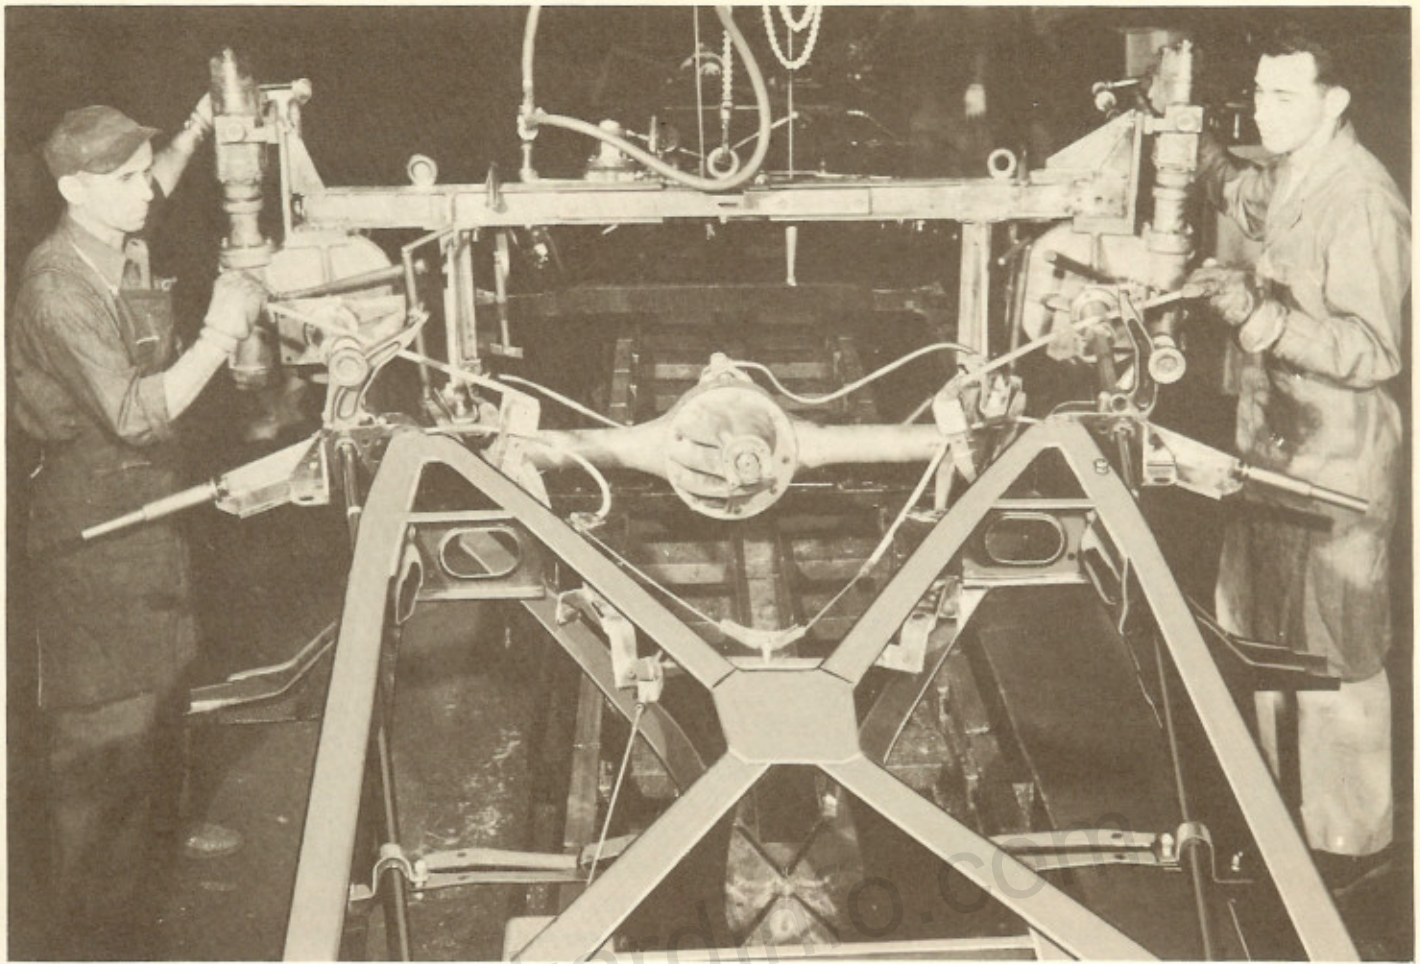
Production Fixture for Winding the Long Torsion Bars
